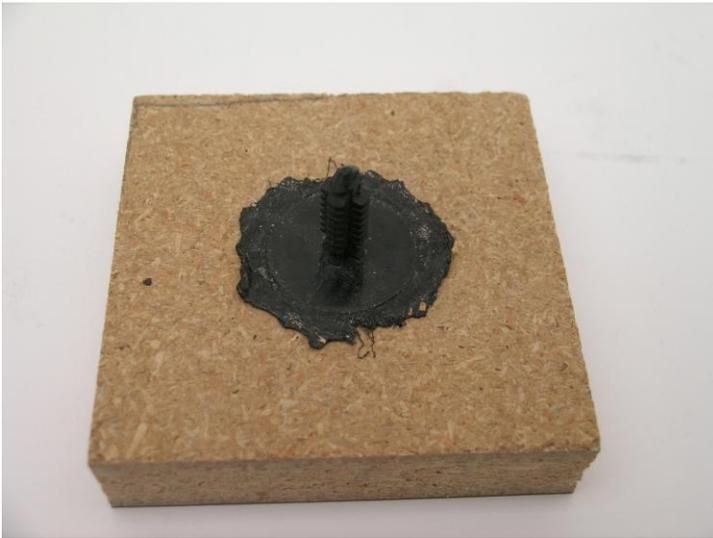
Polypropylene injection molded fastener attached to off the shelf chipboard samples Injection molded
